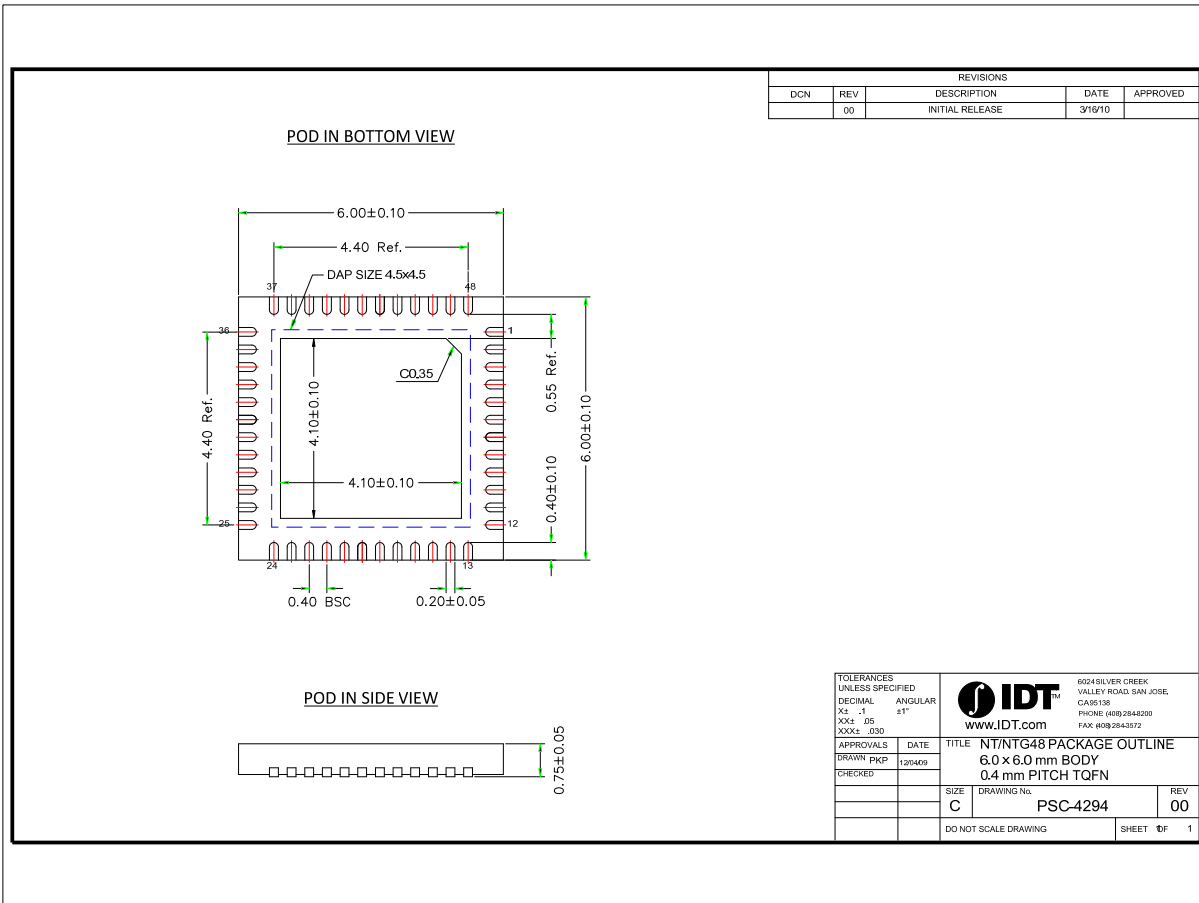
IDTP9036B Package Outline Drawing (NTG48 TQFN-48L 6.0 mm x 6.0 mm x 0.75 mm 48L, 0.4mm pitch)
